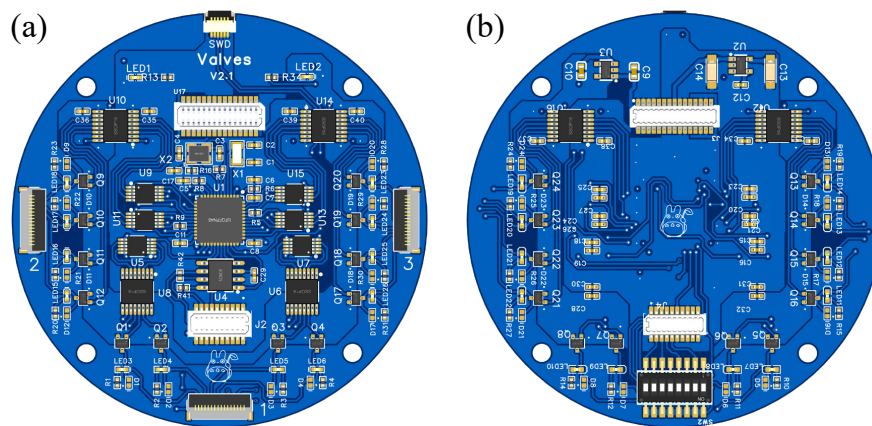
Structure of the valve board: (a) Top view; (b) Bottom view.
